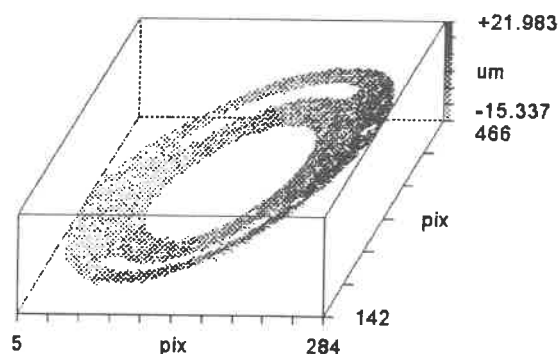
Oblique view of the machined surface of a 70-mm diameter mechanical pump component.
